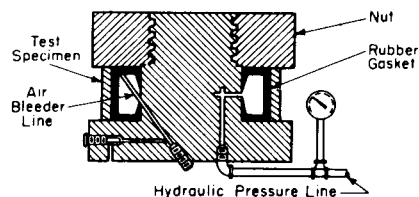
TRANSVERSE TENSION TEST SPECIMEN MACHINED FROM RING CUT FROM TUBULAR PRODUCTS
